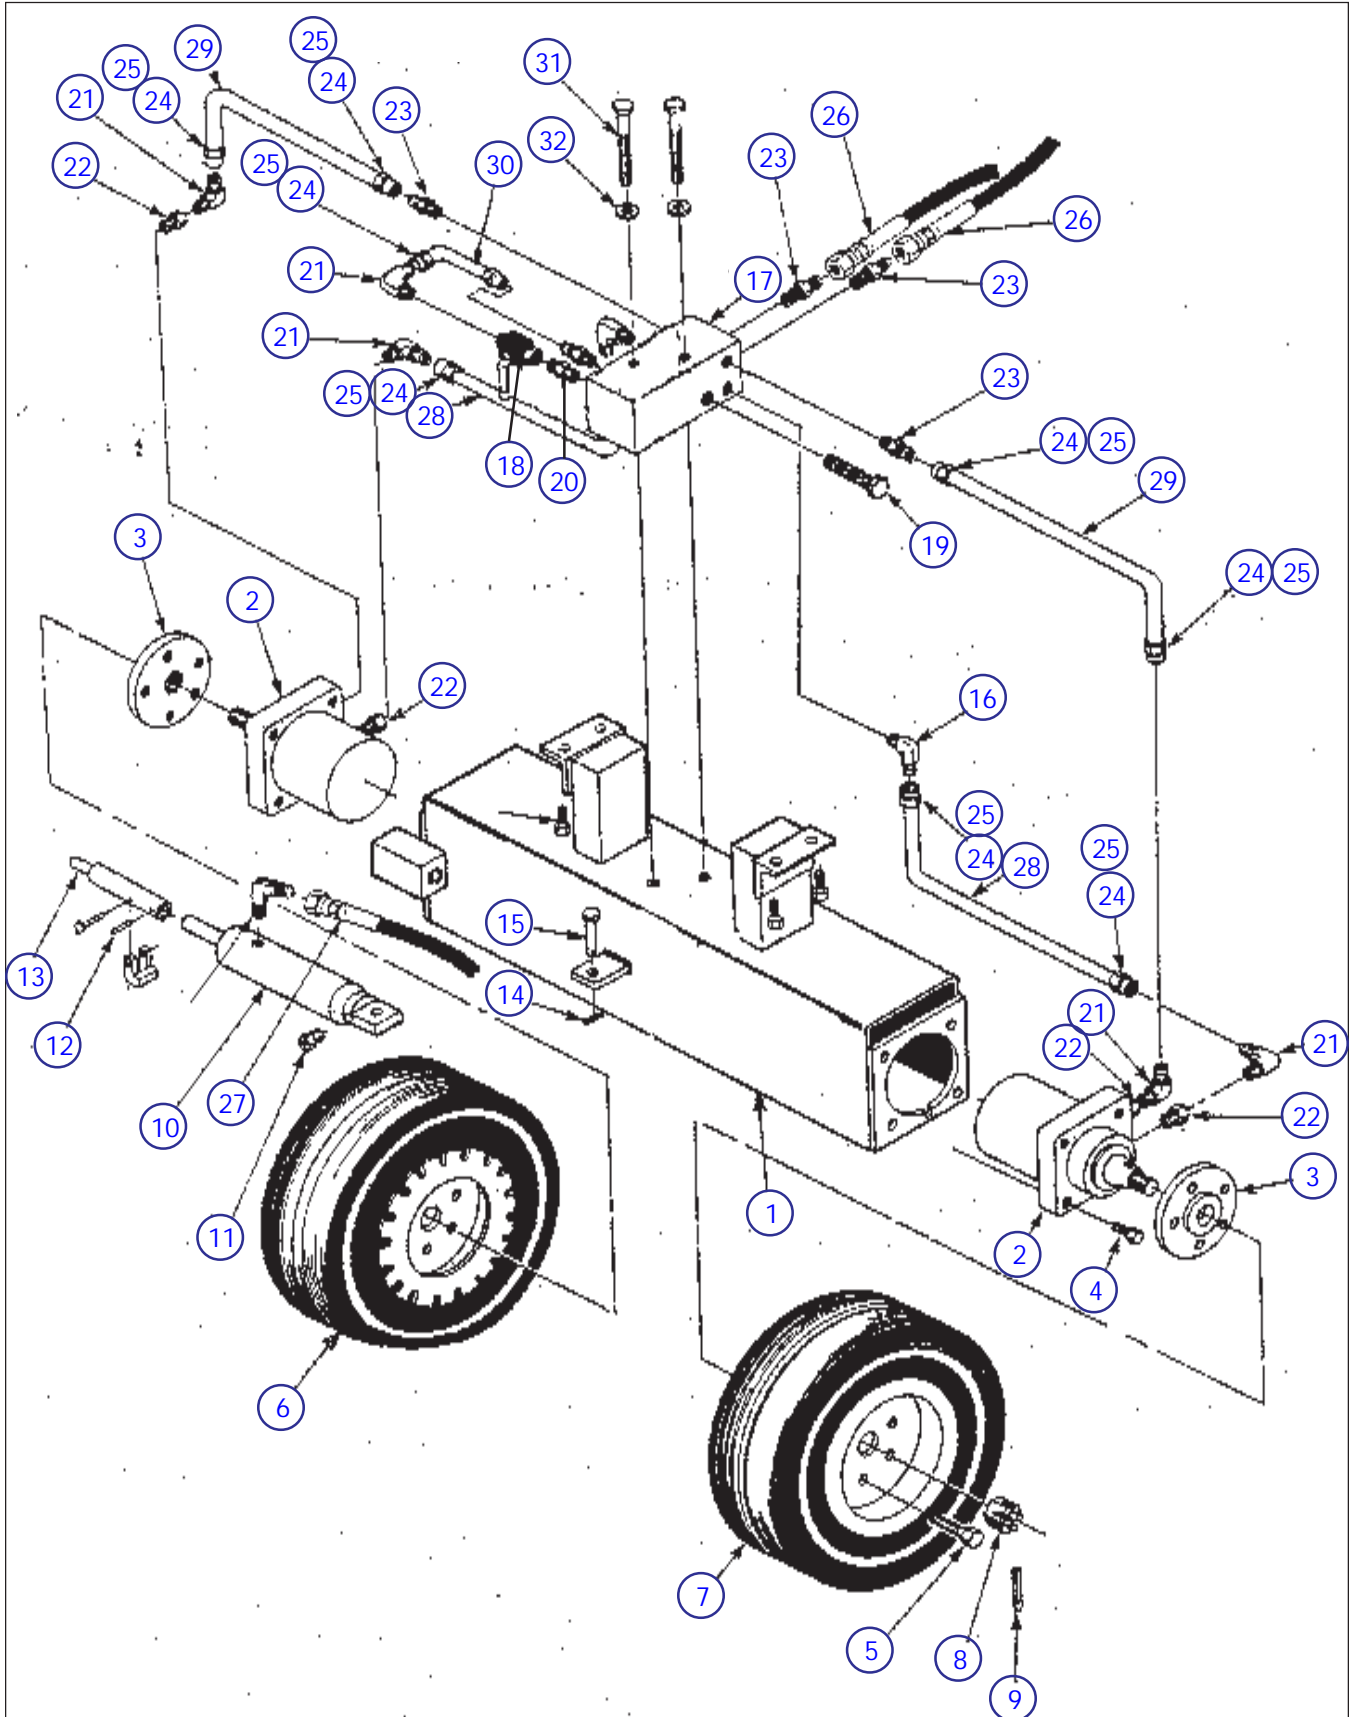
, Rear Axle Assembly, Flat Mount
